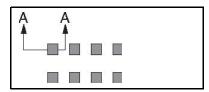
A. SOLDER PASTER PATTERN - TOP VIEW
